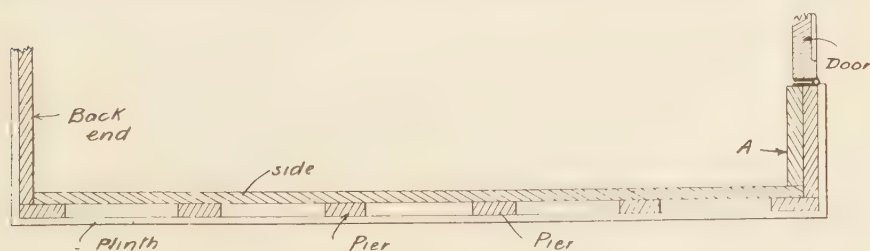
SECTIONAL PLAN, SHOWING HOW SIDES ARE BUILT UP.
